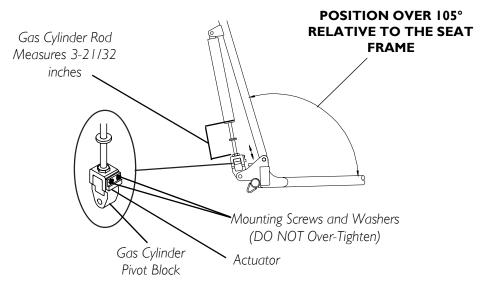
ADJUSTING LIMIT SWITCH
